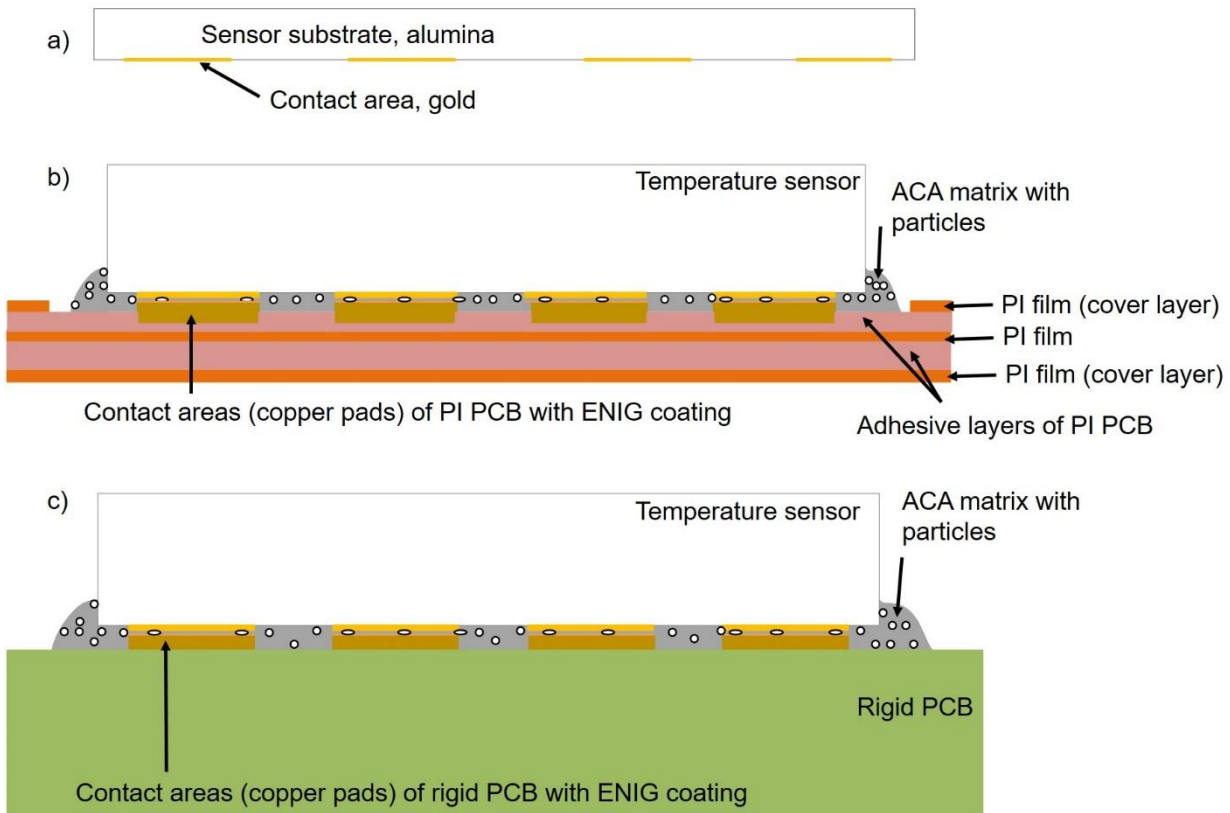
Schematic drawing of a) temperature sensor chip b) temperature sensor attachment on PI PCB c) temperature sensor attachment on rigid PCB.
